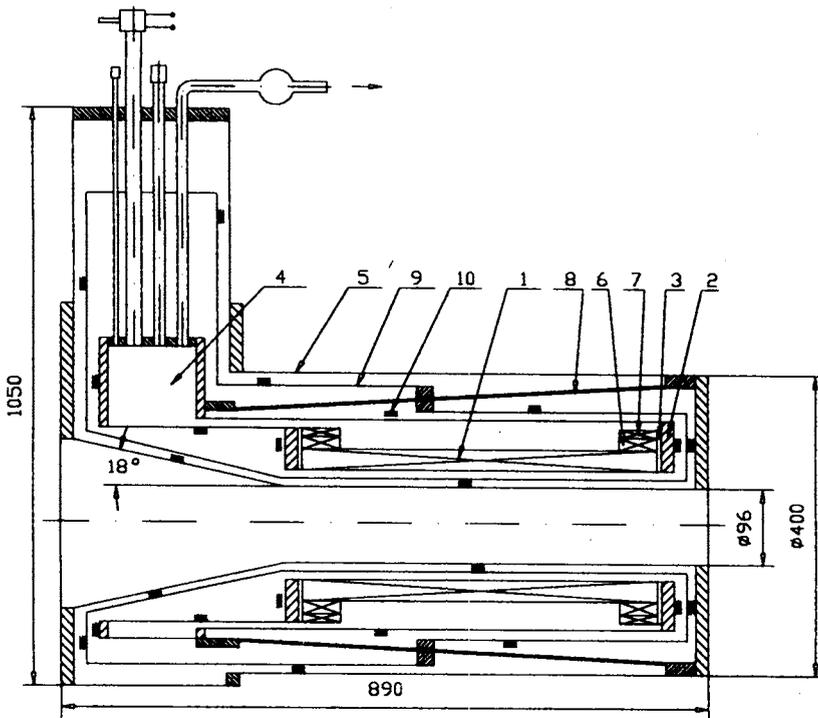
Polarizing magnet MPT: 1 — basic winding; 2 — frame of stainless steel; 3 — insulating half-disks; 4 — helium vessel; 5 — vacuum vessel; 6 — compensating windings; 7 — correcting windings; 8 — glasstextolite support cone; 9 — copper radiation screen; 10 — multilayer superinsulation
